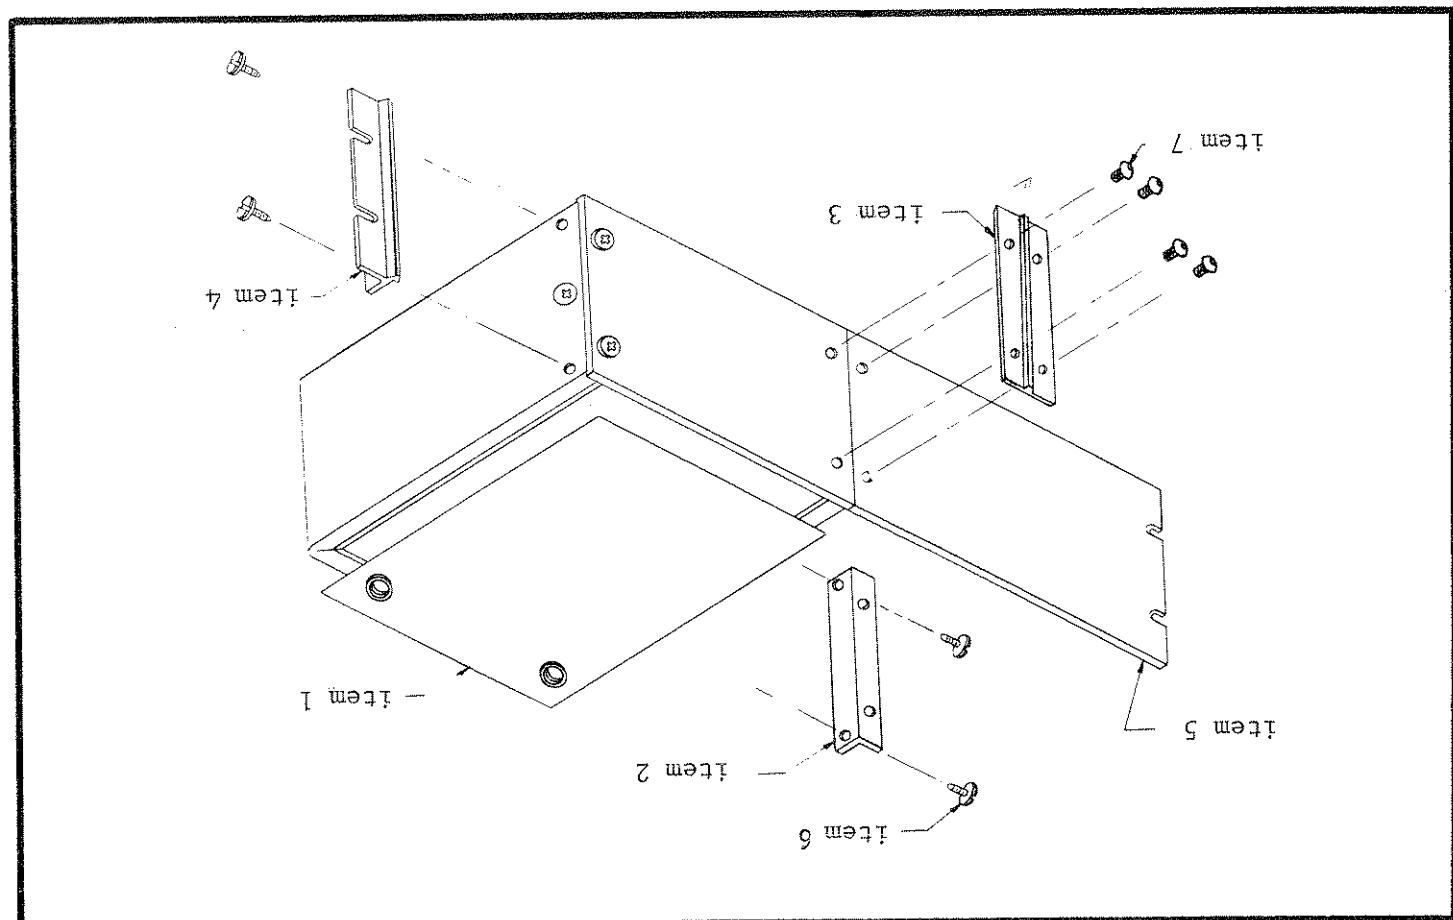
Assembly Drawing for Model 4003A Rack Mounting Kit.
